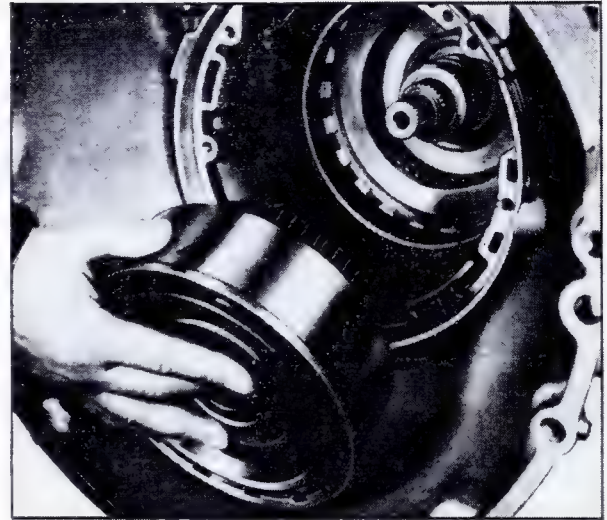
Removing Direct Clutch and Intermediate Sprag Assembly
